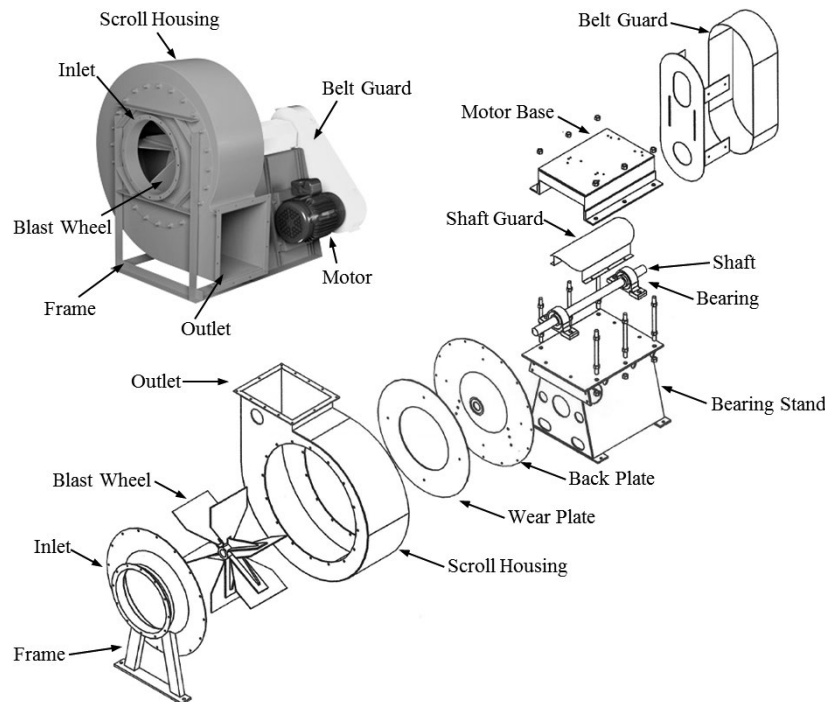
Centrifugal fan components (Exploded view courtesy of Smith Fans Inc., Lamesa, TX).
